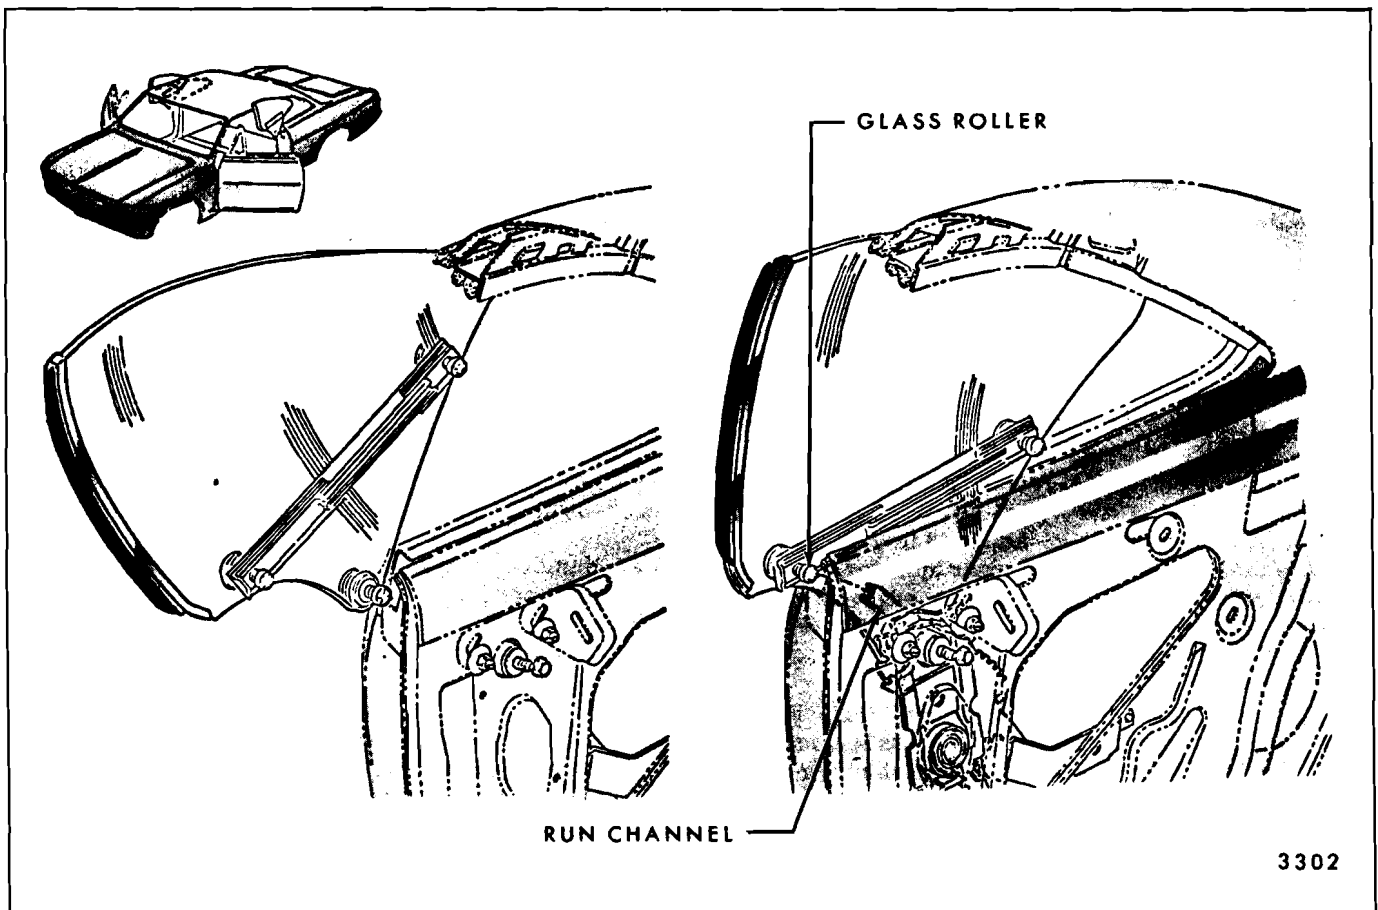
Rear Quarter Window Removal - "Z-37" Style
